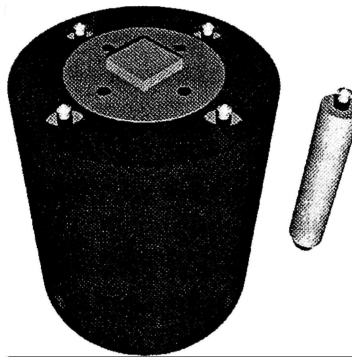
Prototypical TTTC Test Fixture with LDS and TTTC Coupon
